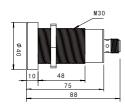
Outline Dimensions UCC - 30GM60 Series
